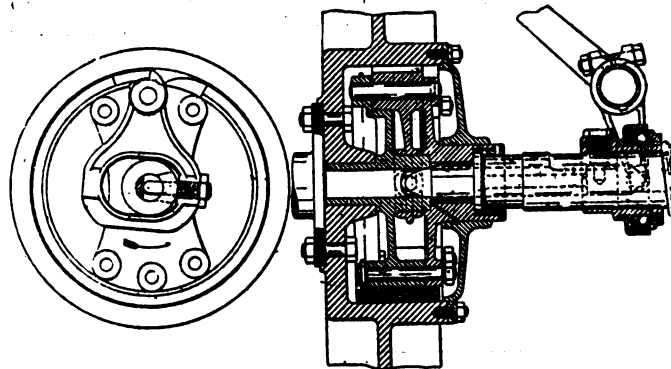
Front and Transverse Sectional Views of Cottin-Desgouttes Metal-to-Metal Clutch.
